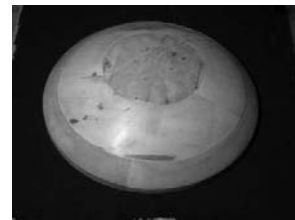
The wooden mould shaped (by turning) as a spherical section, to be used for assembling the lamellae.
